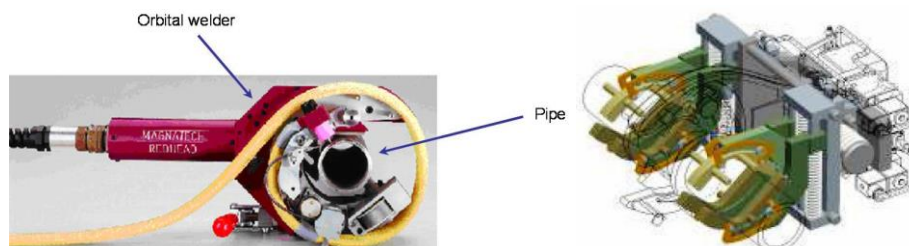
Butt welding tool LEFT: commercial model and RIGHT: drawing[4]
